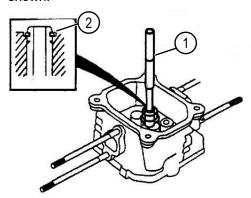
Exhaust Guide Fully Installed (clip fully seated)
